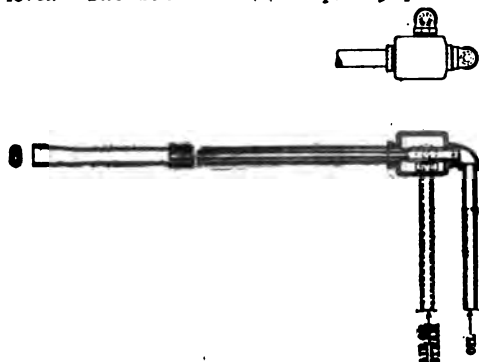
OIL BURNER FOR OPEN HEARTH FURNACES.
